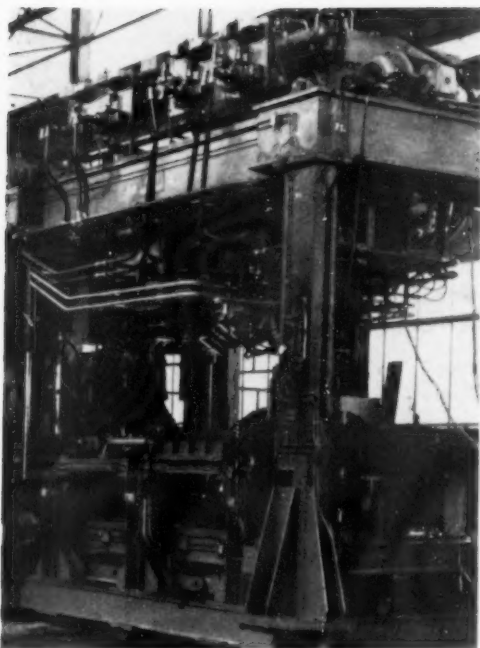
Completed press multi-welder with upper and lower die-sets in position and ready to operate. A jig trolley is in position on the lower die-set
